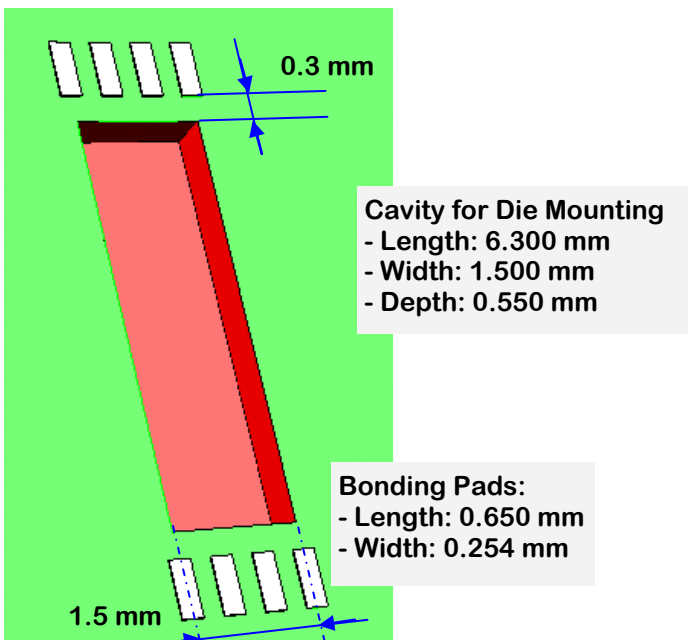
Die Cavity Dimensions and Bonding Pad Dimensions and Position
